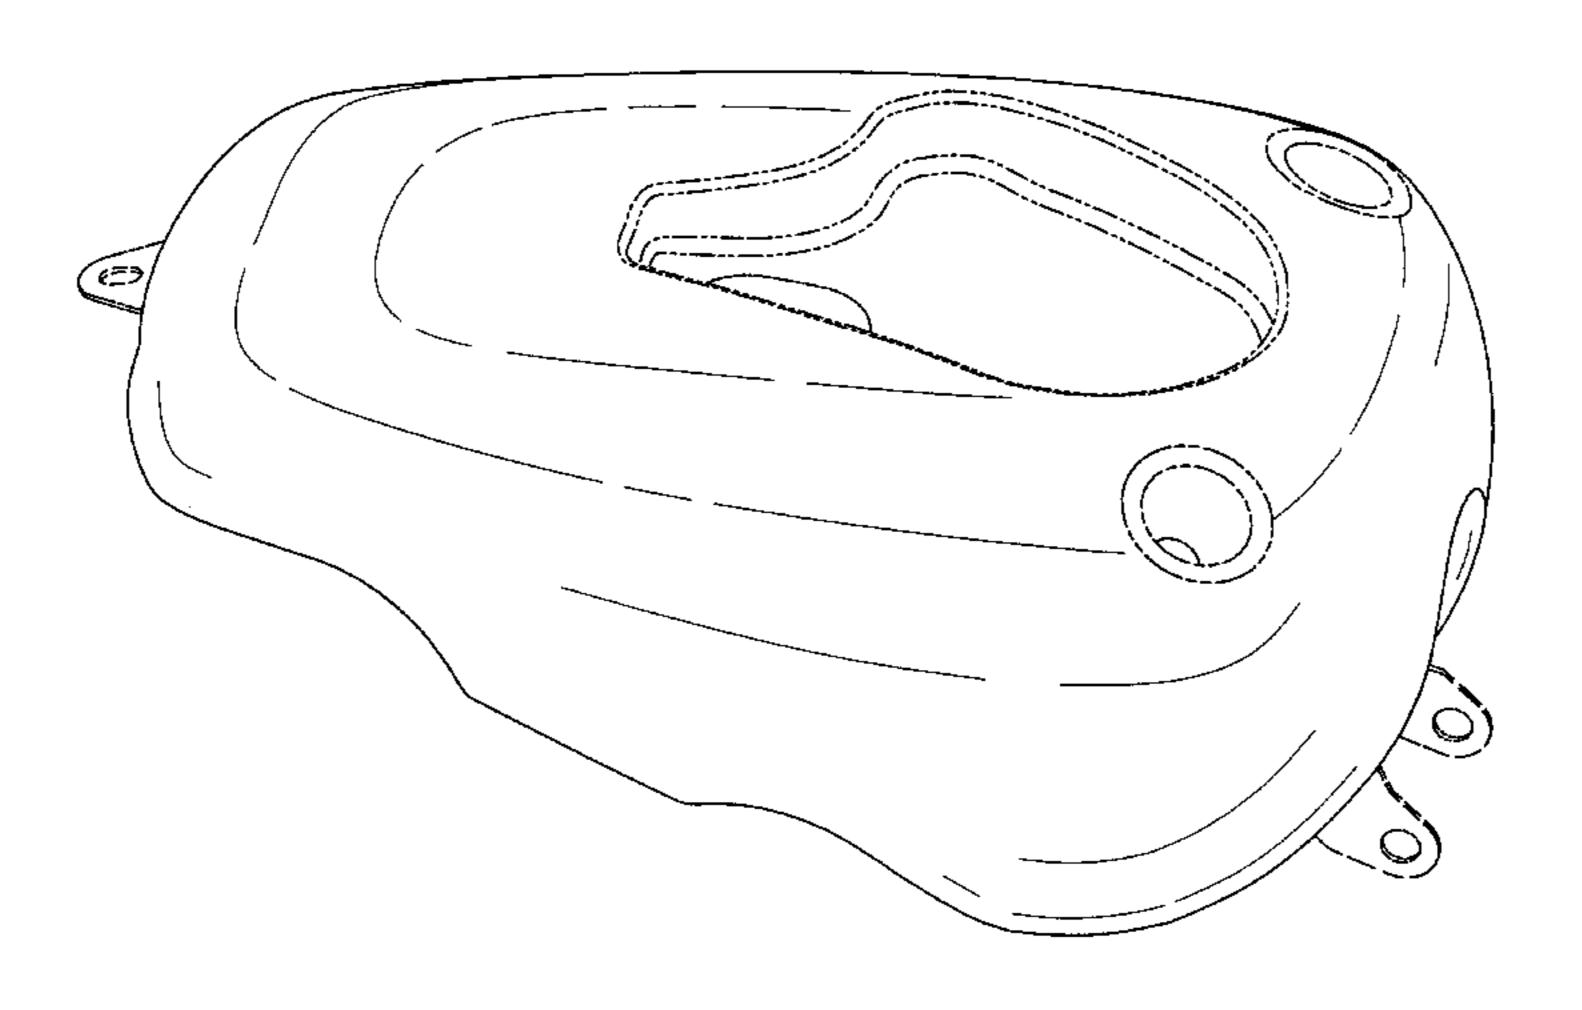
is a right side view of the motorcycle gas tank of FIG. 1; and,
